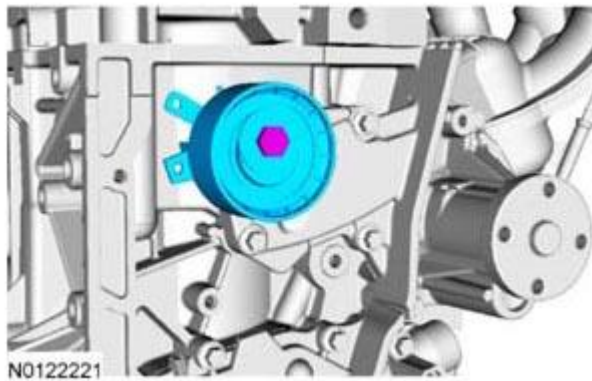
Identifying Bolt And Timing Belt Tensioner
